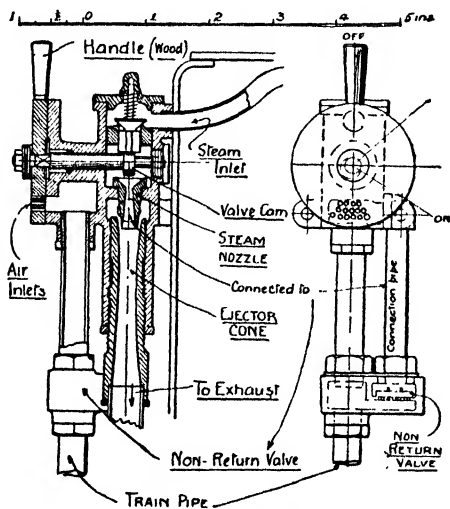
Author's Design for Model "Simple" Vacuum Brake Ejector and Driver's Valve.
